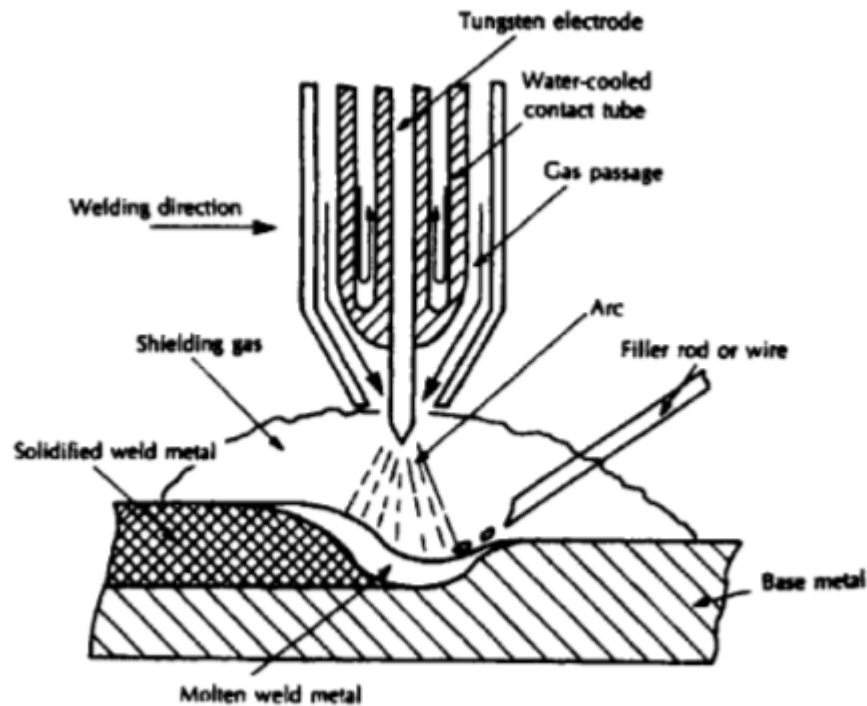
Schematic drawing of Gas Tungsten Arc Welding (Messler R. W., 2004)
